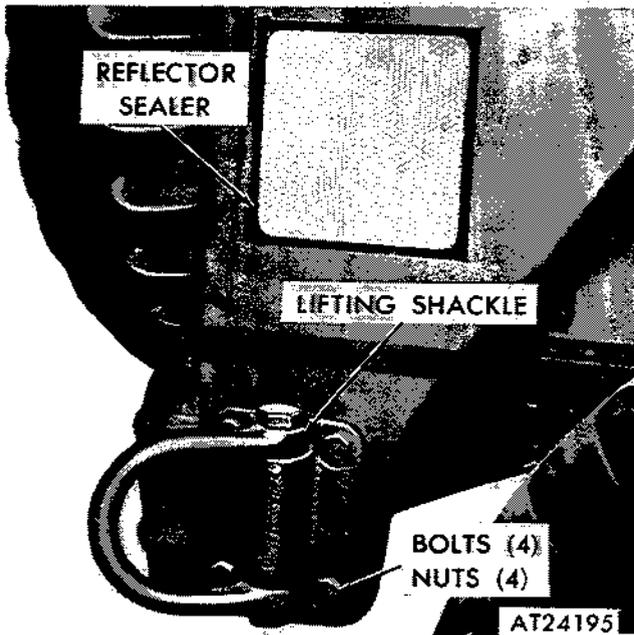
Removing or installing rear lifting shackle assemblies. (M825, M151A2, and M718A1 vehicles.)
